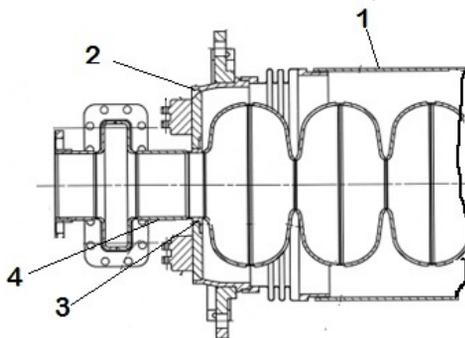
Scheme of combined adapter connection with a cryogenic module: 1 – steel shell; 2 - electron beam welding or argon arc welding connection of shell with steel flange of adapter; 3 - steel flange; 4 - niobium tube.
